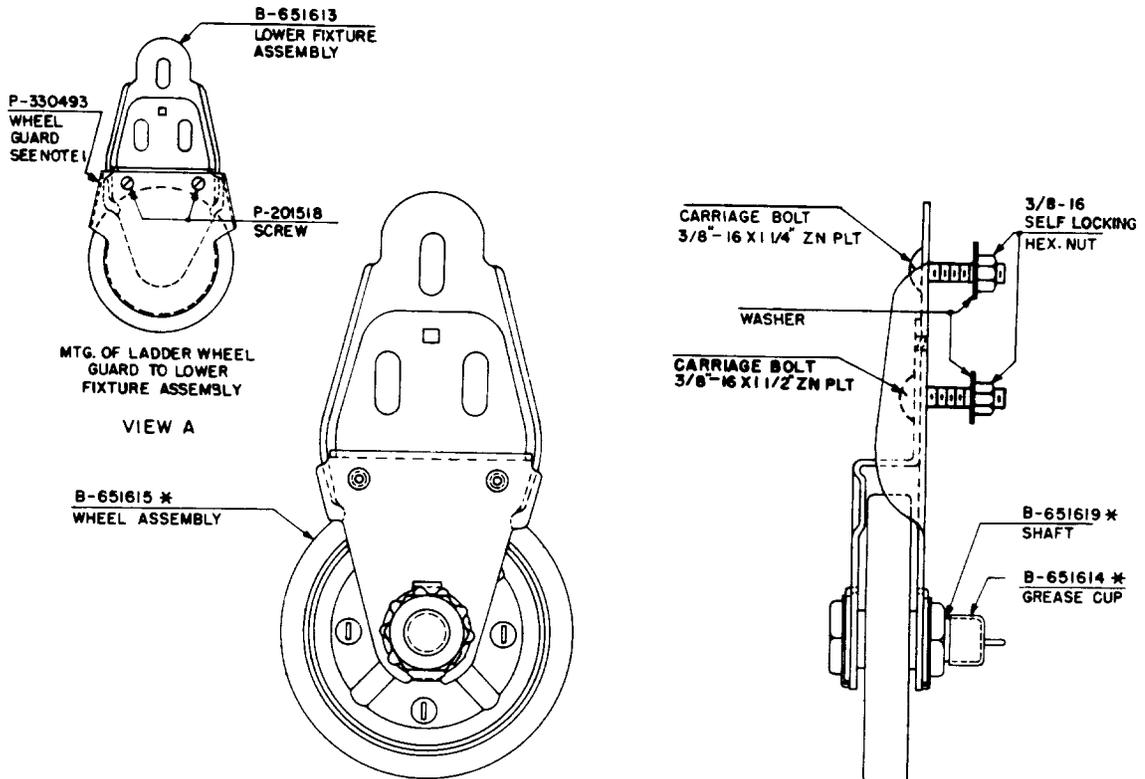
Lower Fixture Assembly, P-450360, and Wheel Shaft Type
